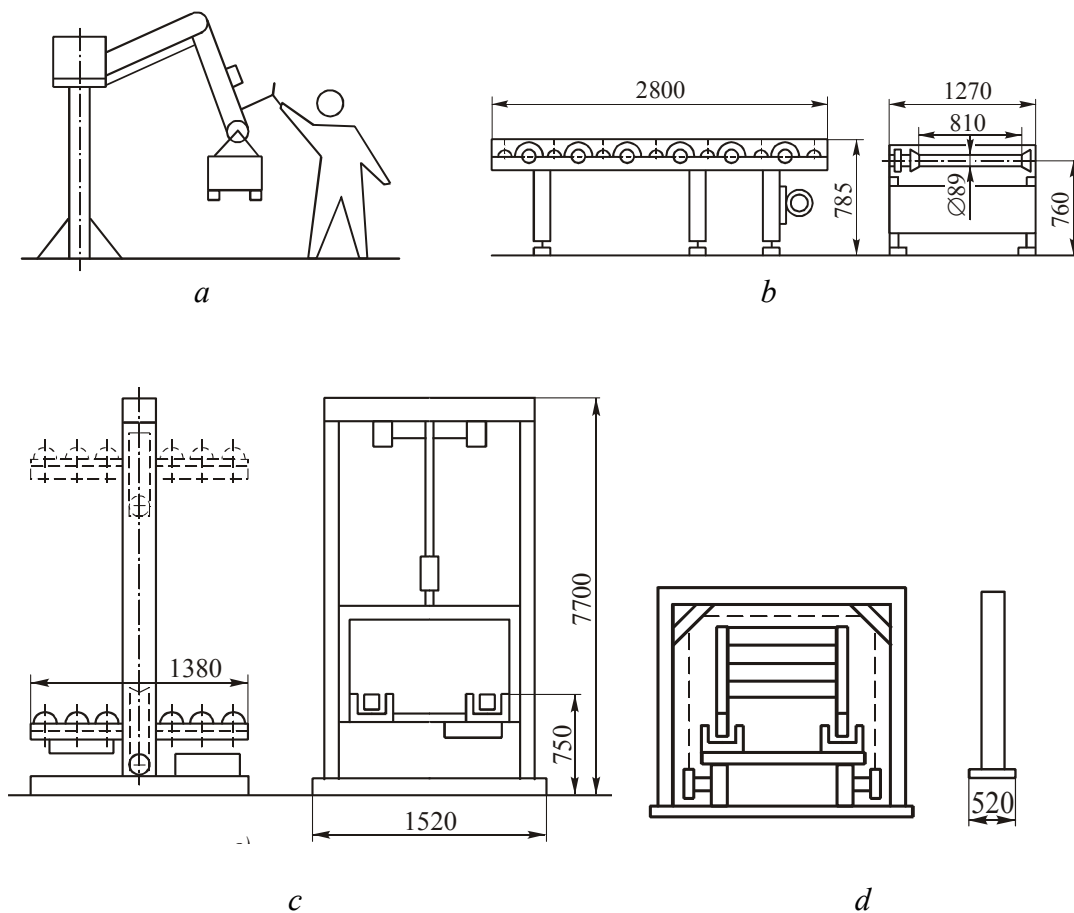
The equipment for receiving and delivering loadings in storehouses: a – the articulated balanced multilink manipulator; b – the pick-and-place rolling powered conveyor; c – the hoist; d – the inspection section of overall dimensions
